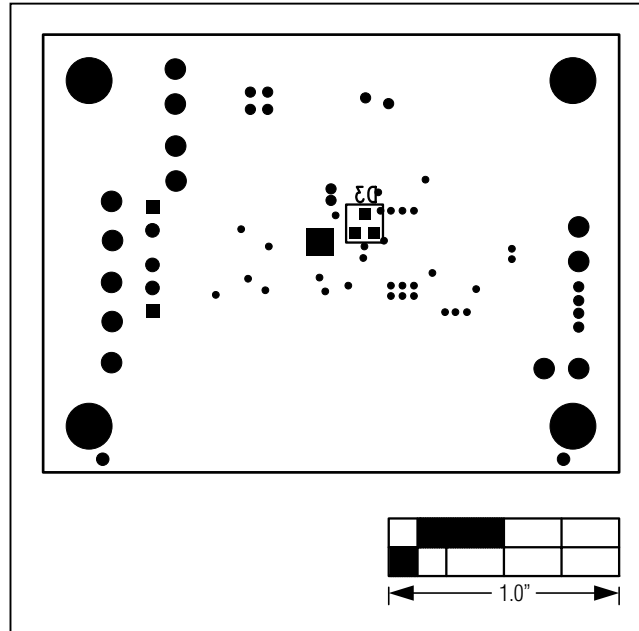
MAX16952 EV Kit Component Placement Guide—Solder Side
